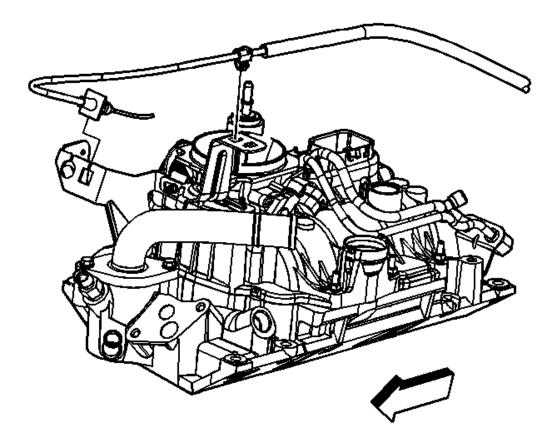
View Of Accelerator Cable To Accelerator Control Cable Bracket Courtesy of GENERAL MOTORS CORP.
